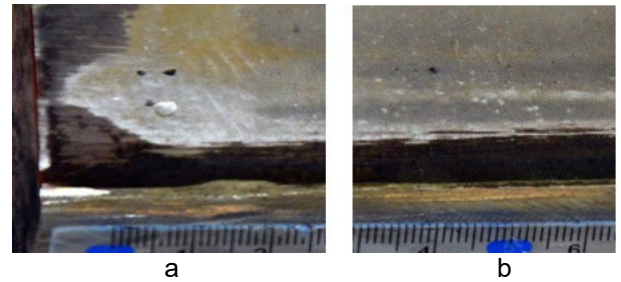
Cut tooth (a) from a rejected gear (b)
